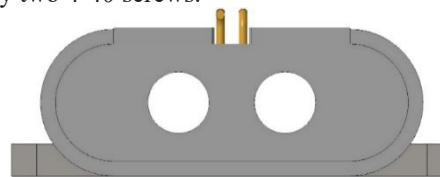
Magnet design used on the APS-U 1.9 m SCUs showing single piece core and footed poles.
